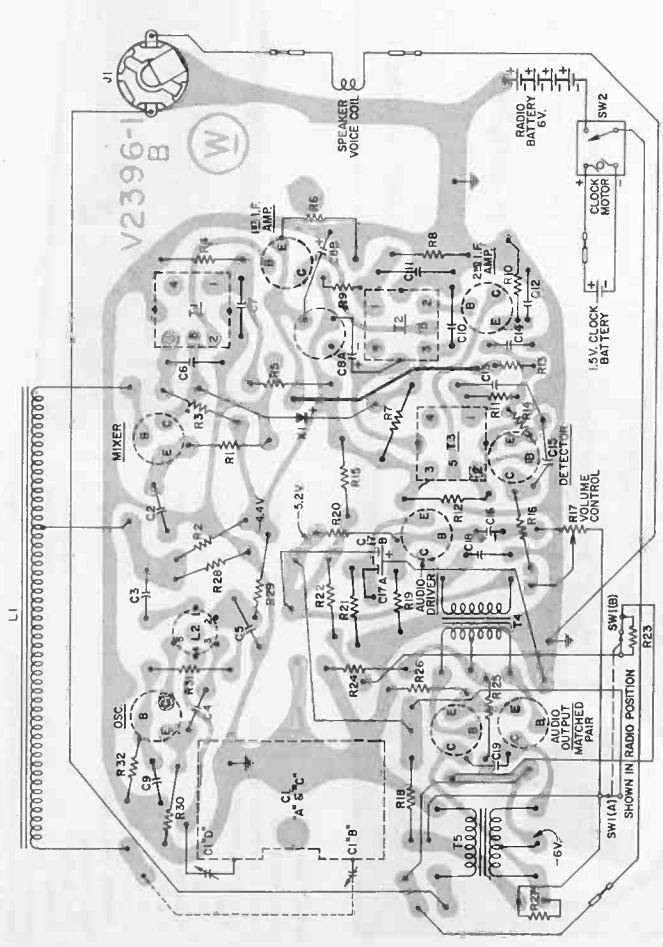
Bottom view of printed circuit board with components shown symbolically.
